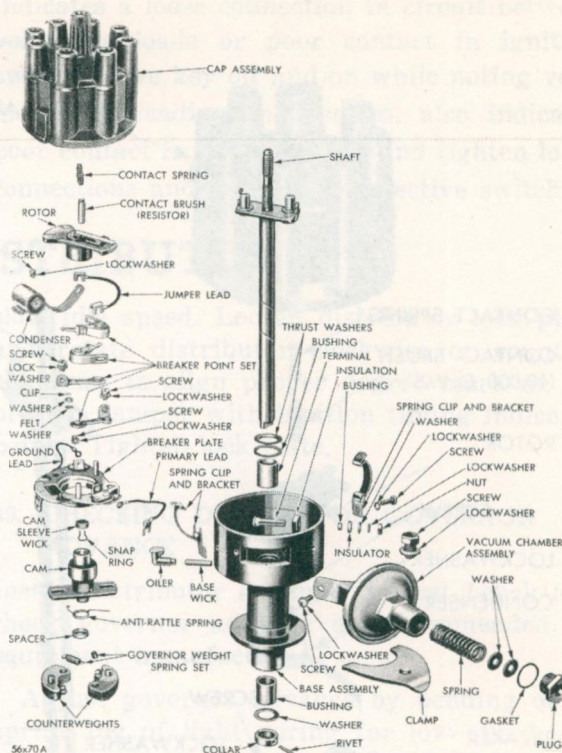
Dual Point C-76-IM-124 Distributor (Disassembled)
